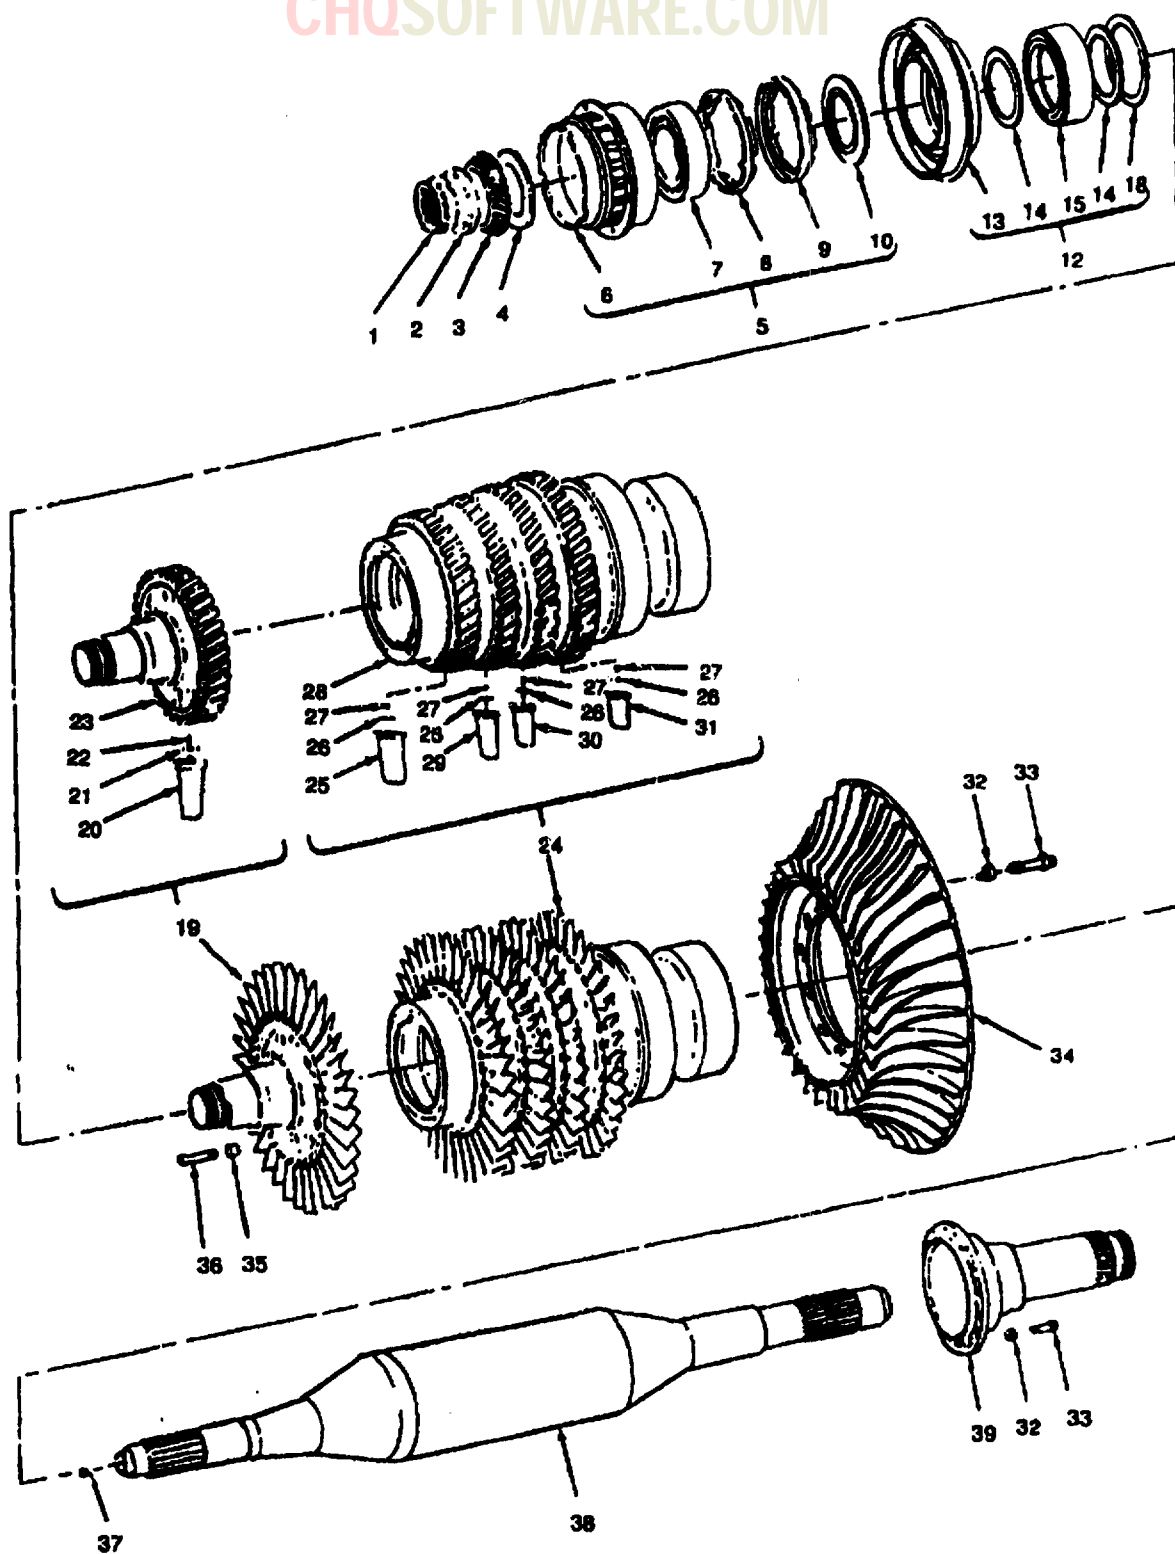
Compressor Rotor Assembly (T53-L-13B, -701A, -703).
